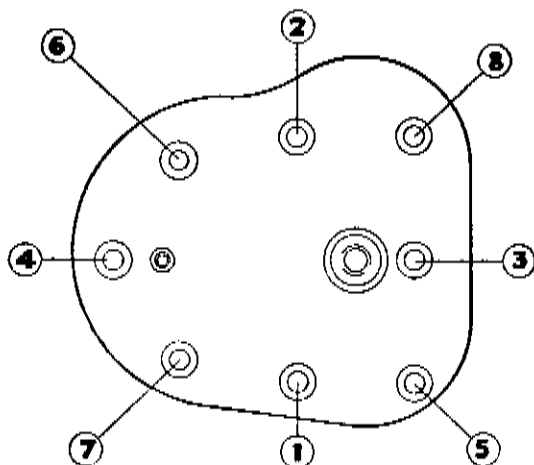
Order of tightening cylinder head bolts (S.V.)
